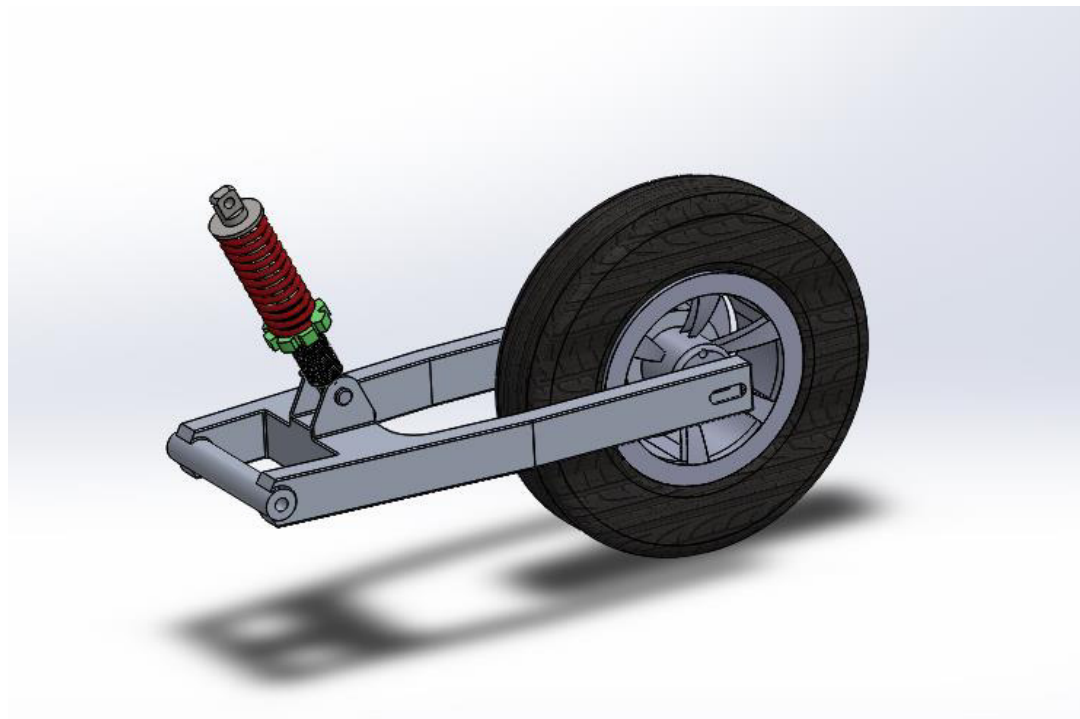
Rear wheel Assembly including Mono-shock Suspension
